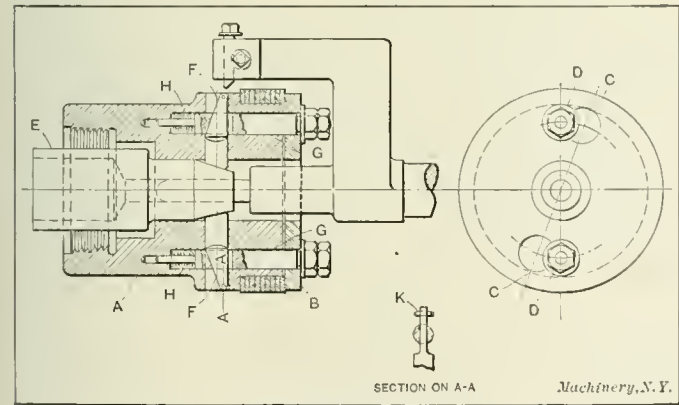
Adapter used in Holding the Washers while Turning their External Diameters
